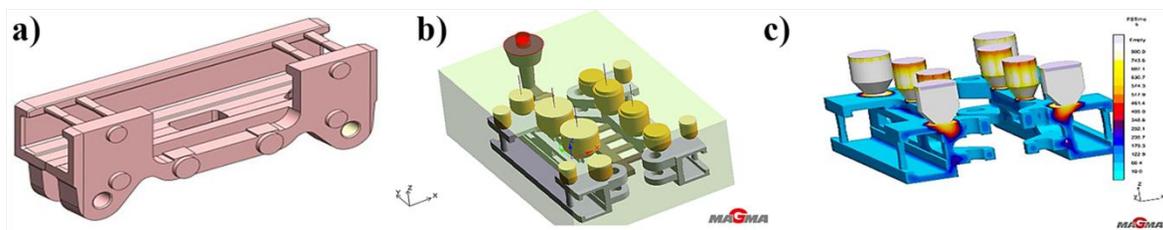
a) guider frame; b) casting technology of the two guider frames; c) simulation of the casting solidification
